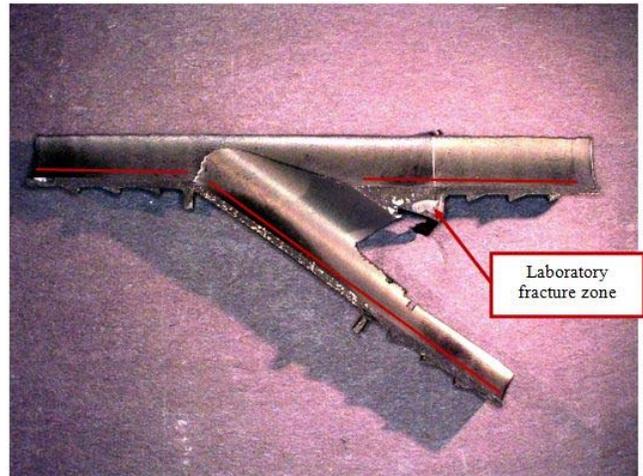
Photomicrograph showing the fracture surface after completion in the laboratory. The failure fracture surfaces are indicated by the red lines.
